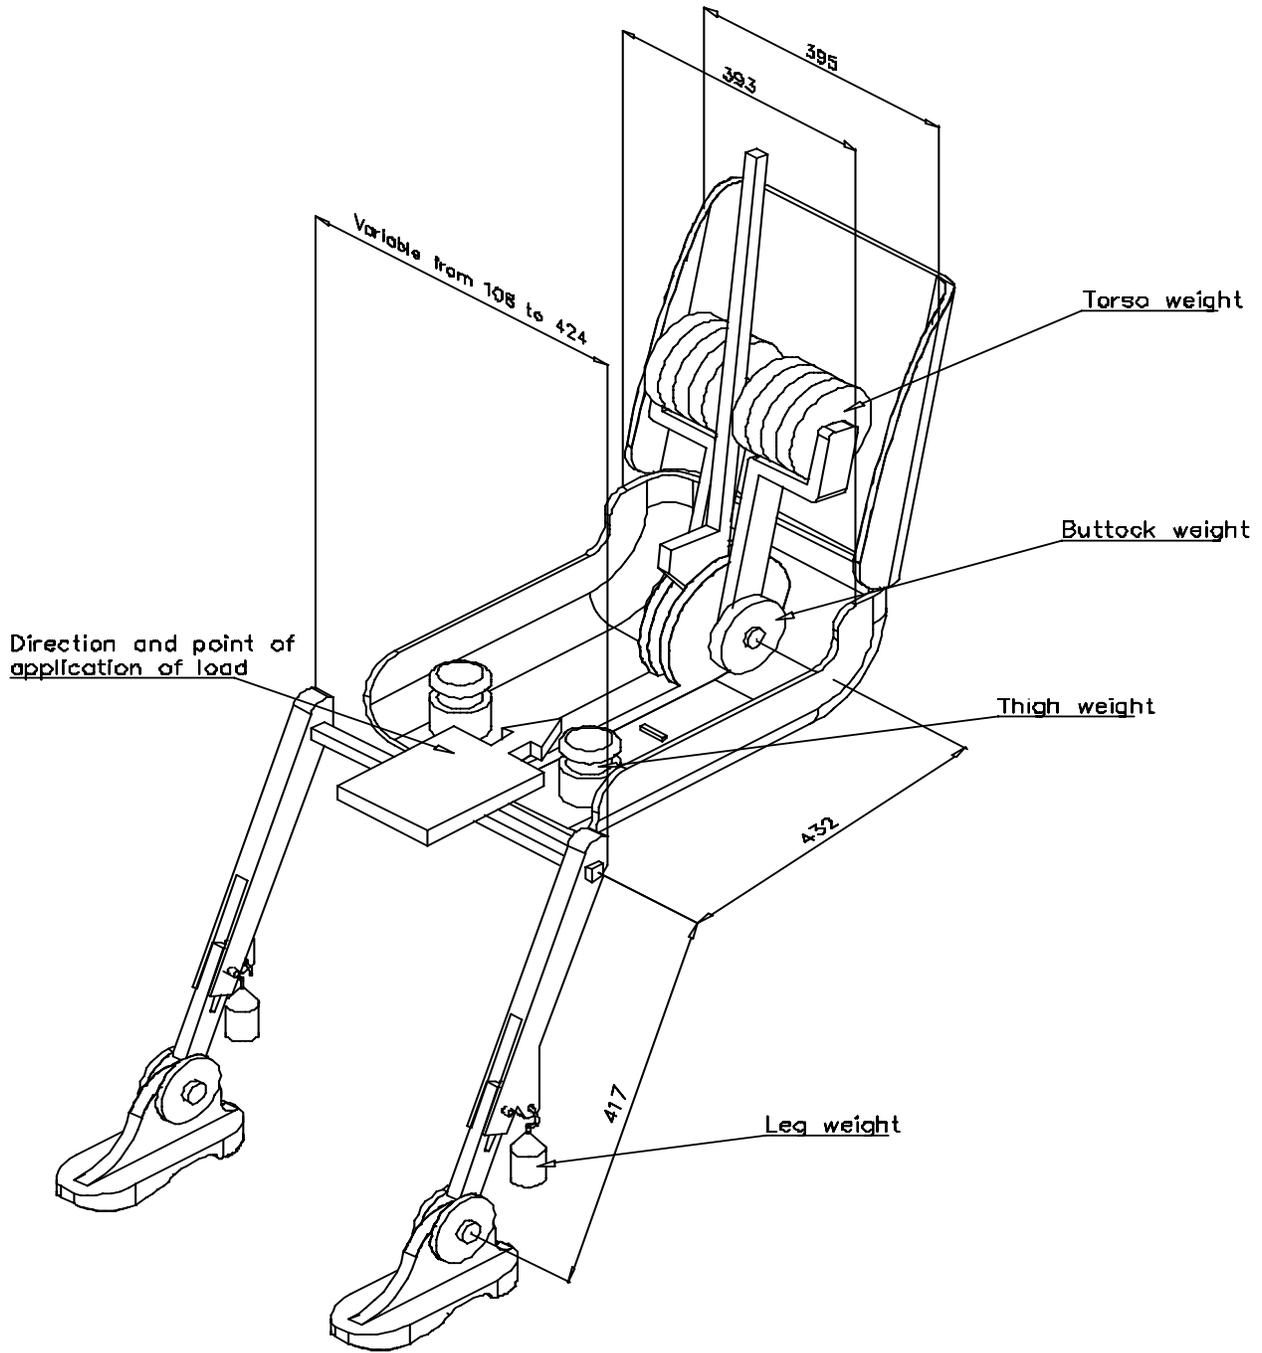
Dimensions of the 3 DH machine elements and load distribution
